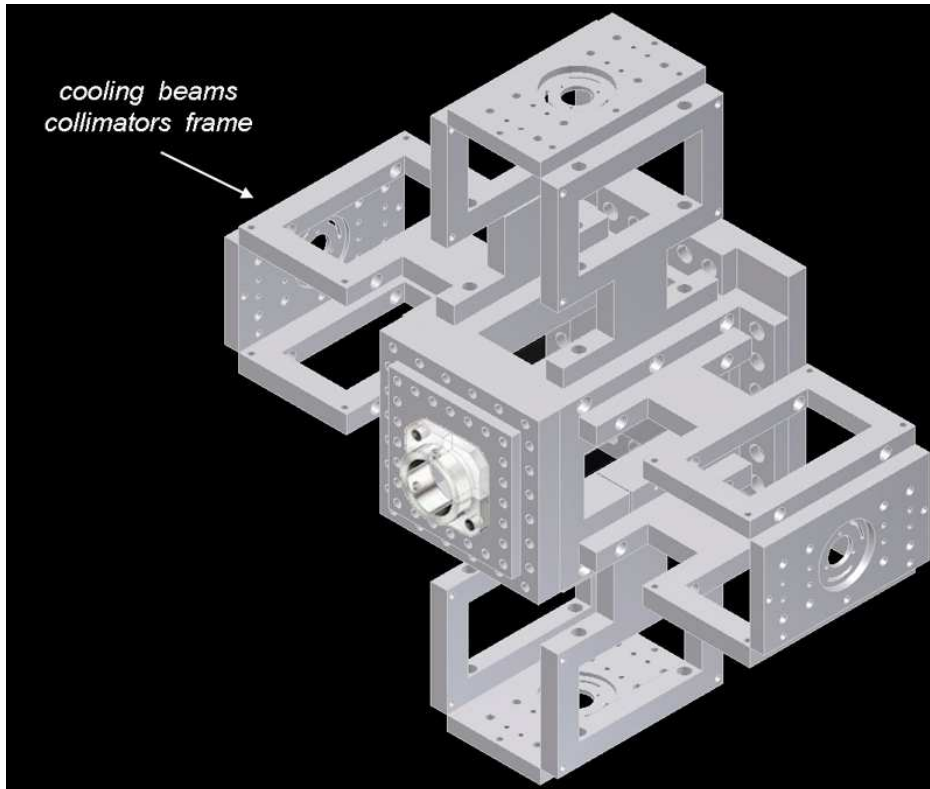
3D view of *Space Atom Interferometer 2D-MOT* mechanical frame, here seen from backside, the main body is at the center of the frame and four beam collimators are screwed on it in a crossing configuration. In back side an adaptor for pushing beam collimator [136].
